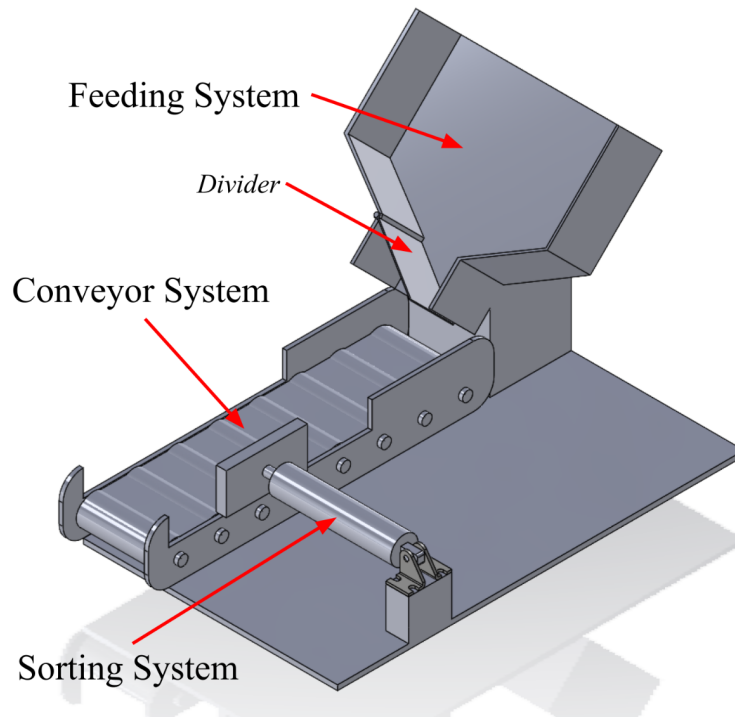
Isometric view of the “One-by-One Pneumatic Pushing Mechanism.” The mechanism is consisted of three subsystems: feeding system which enables the wastes to align in a single file line (due to spring loaded divider), conveyor system which transports the wastes, and sorting system which pushes the contaminants out of the workspace through a pneumatic air cylinder.
